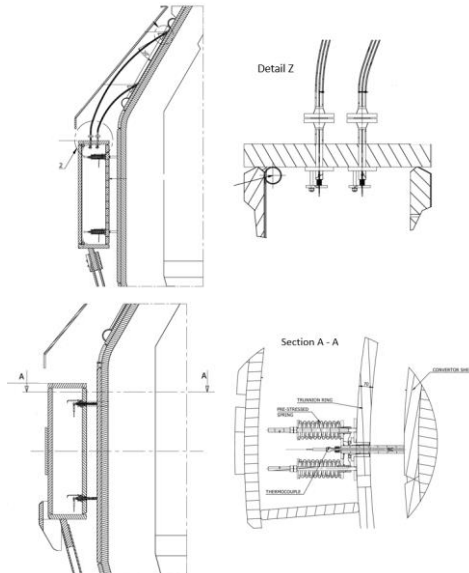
Arrangement of the thermocouples on top cone (left) and barrel section (right) of Q-Temp 2.0
